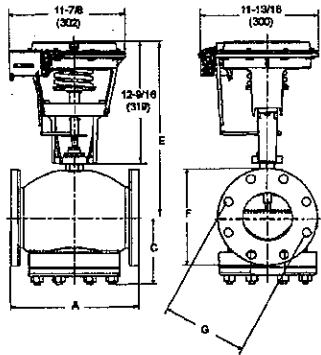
MK-6811 with Flanged 2-Way Globe Valves
